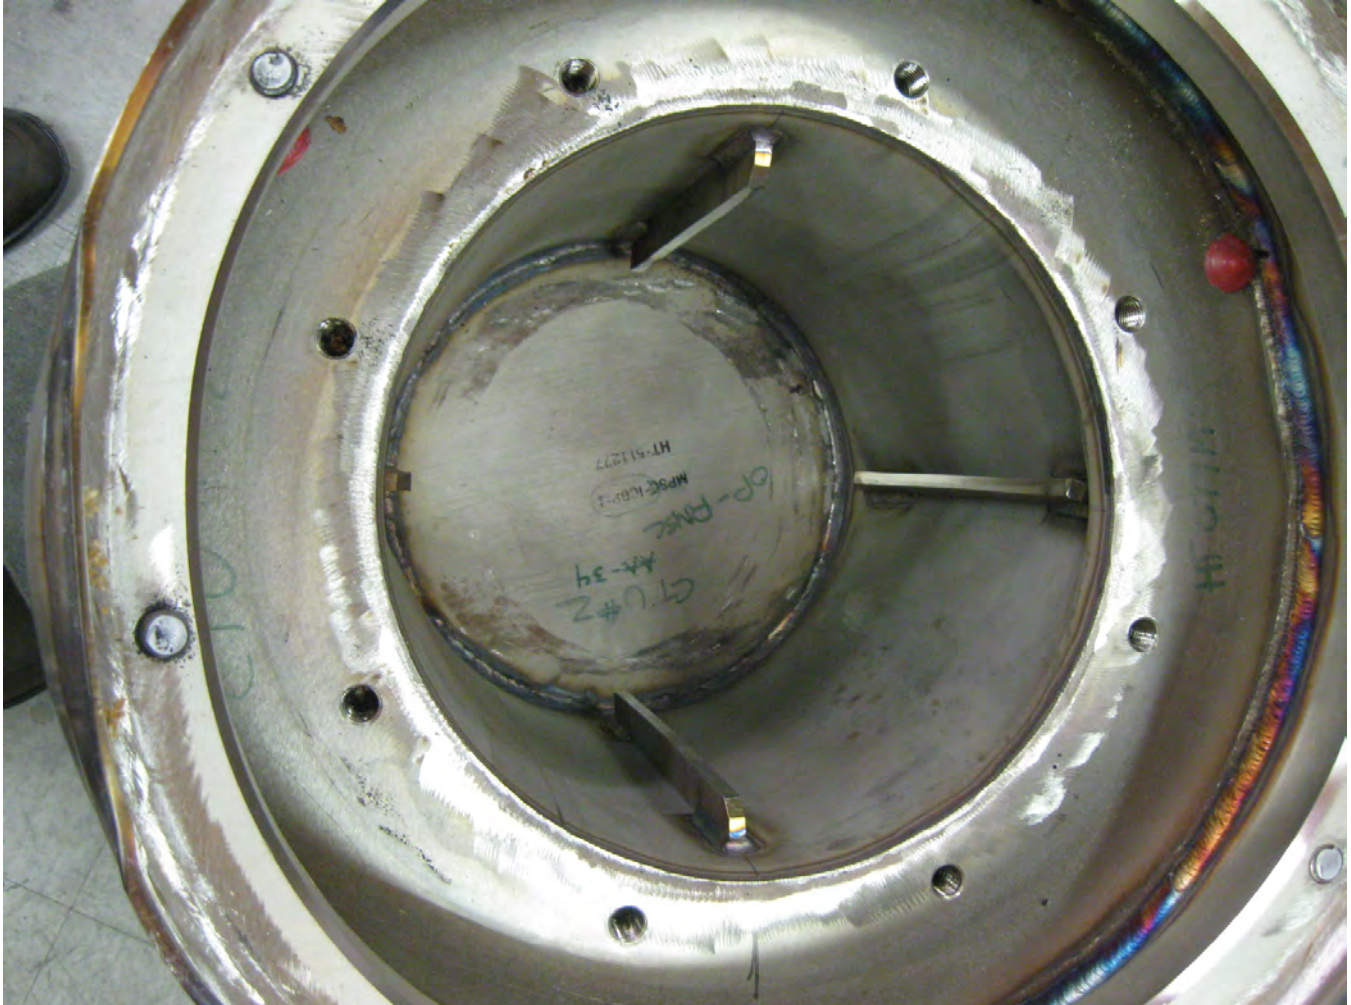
CTU-2 Post-Test Disassembly: View of OP-RMSC Cavity w/ Side Impact Damage to Inner Wall (Left Side)
